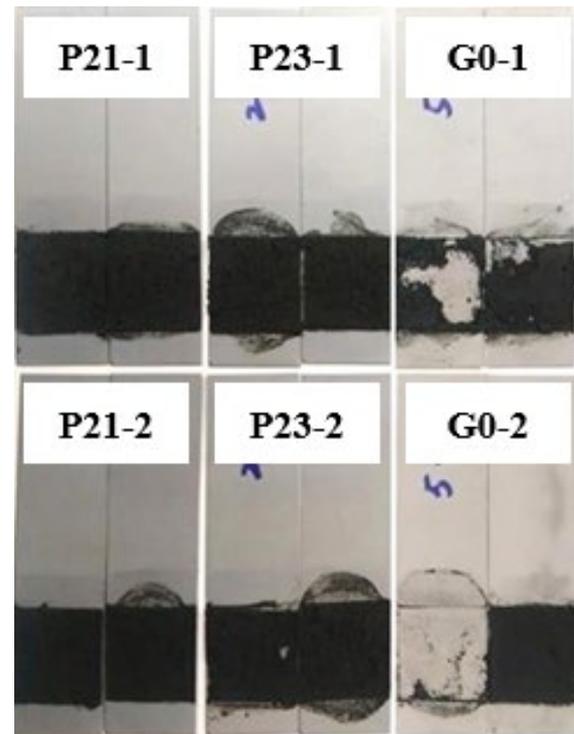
Test specimens (No. P21, P23, G0) after shear tension test using vibration damping adhesive.
